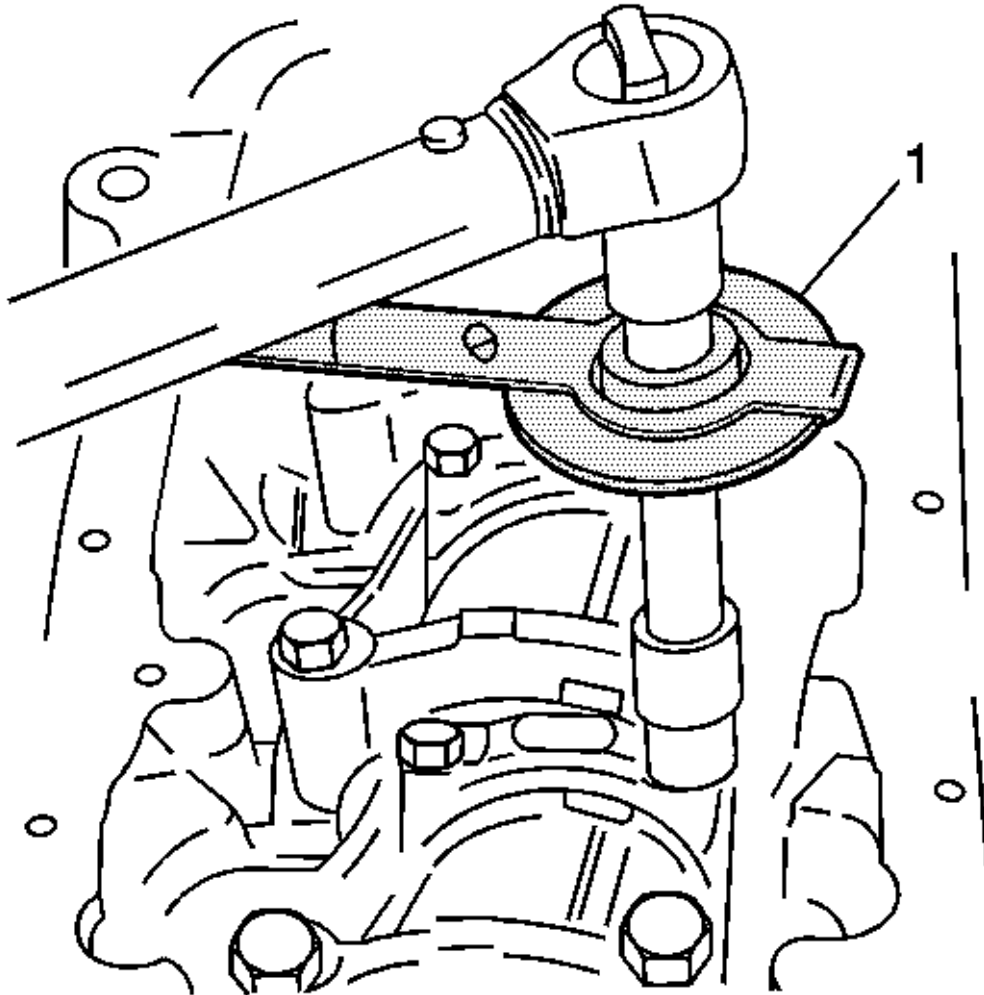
Tightening Connecting Rod Bearing Cap Bolts
